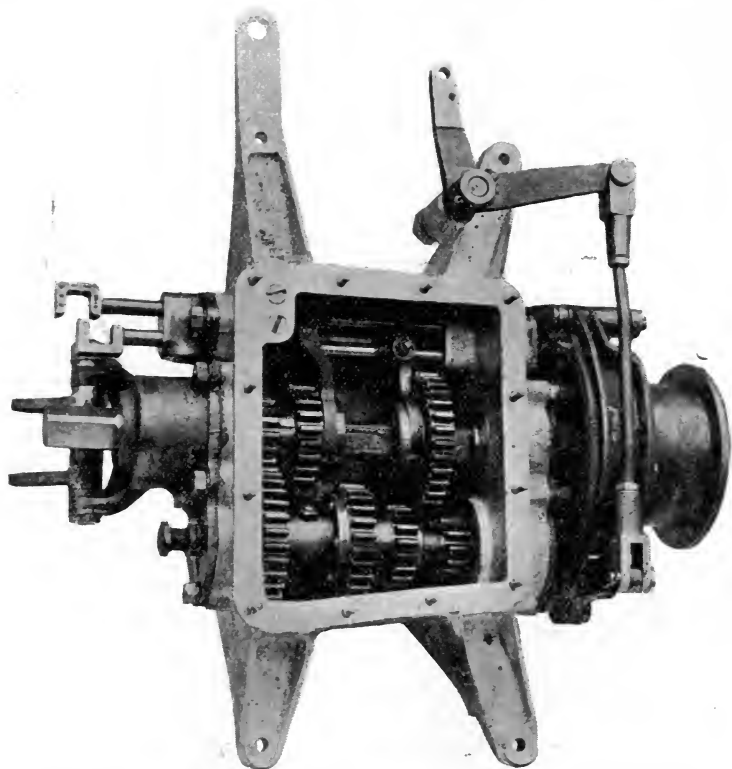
DIRECT DRIVE GEAR BOX, TOP SPEED POSITION, THE DOG CLUTCHES ON THE FACES OF PINIONS J AND L (see fig. 59) BEING IN MESH.
